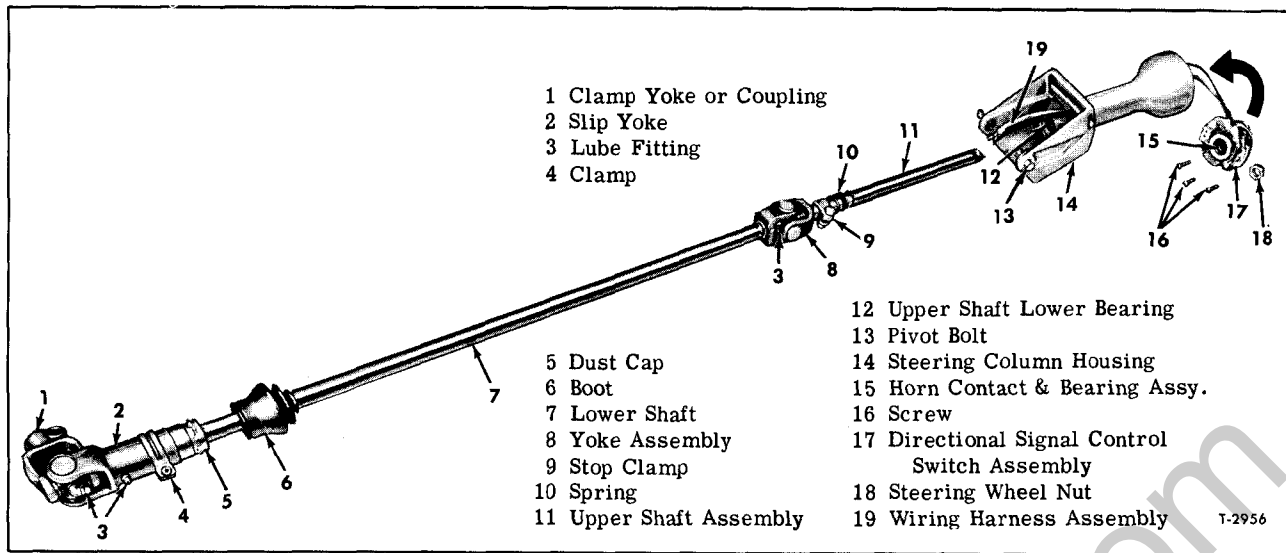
Steering Column and Shaft Removed (Conventional Cab Models) (Typical)
